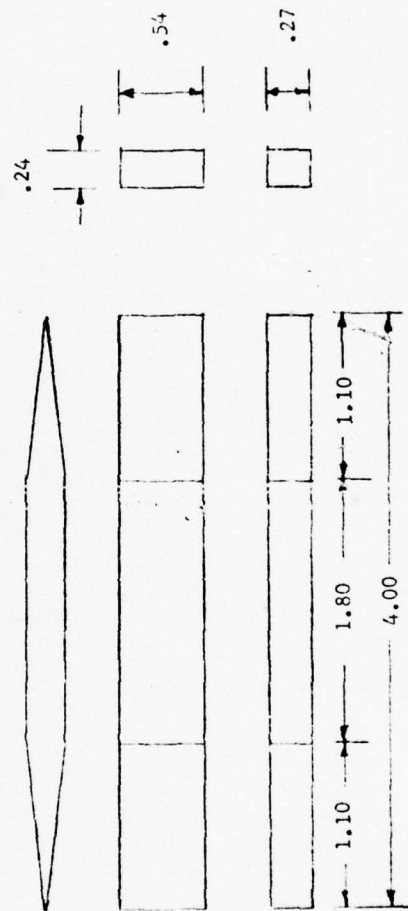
Geometric Details of a Fuselage Mounted MER and of the Long and Short Pylons
